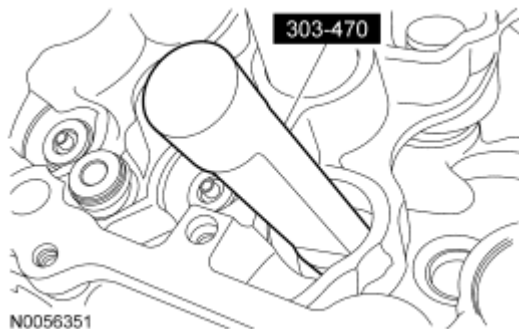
Installing New Valve Stem Seal Using Special Tool (303-470)
